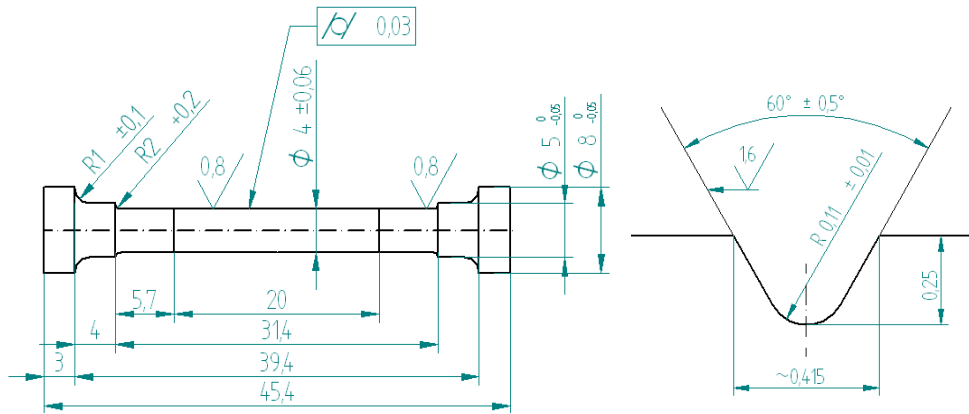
Drawing of used specimen and notches machined in the centre of each specimen
